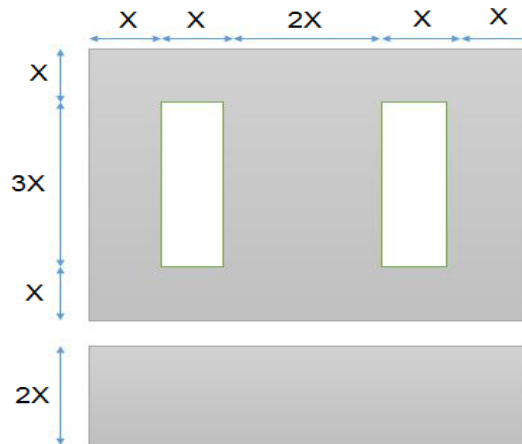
Transformer Geometrical Dimensions (x=11mm)
